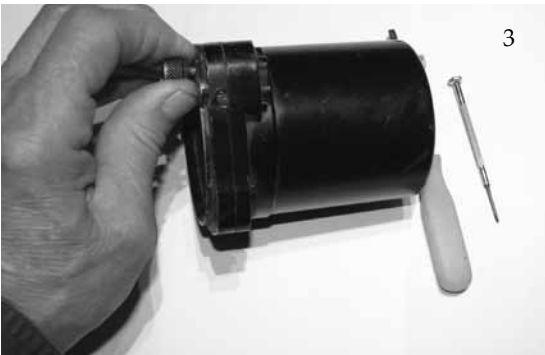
insert a paperclip or a small screwdriver into the threaded hole and slide the pin outwards. It will probably be stiff, but it will click and move 1/16". This frees the adjusting knob.
